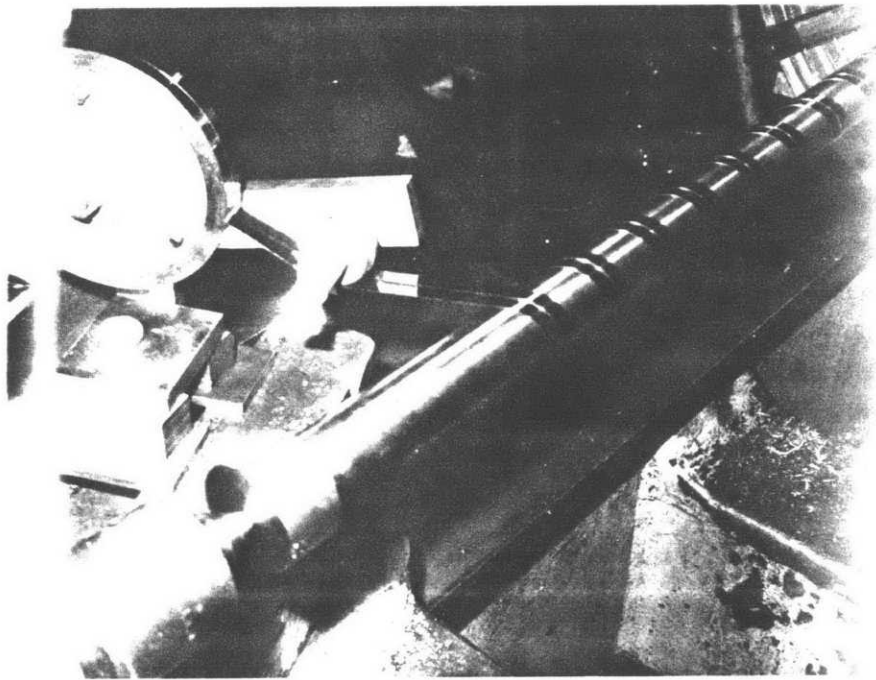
Photograph of the tape applicator used to make casting grooves for the spiral spacers.
